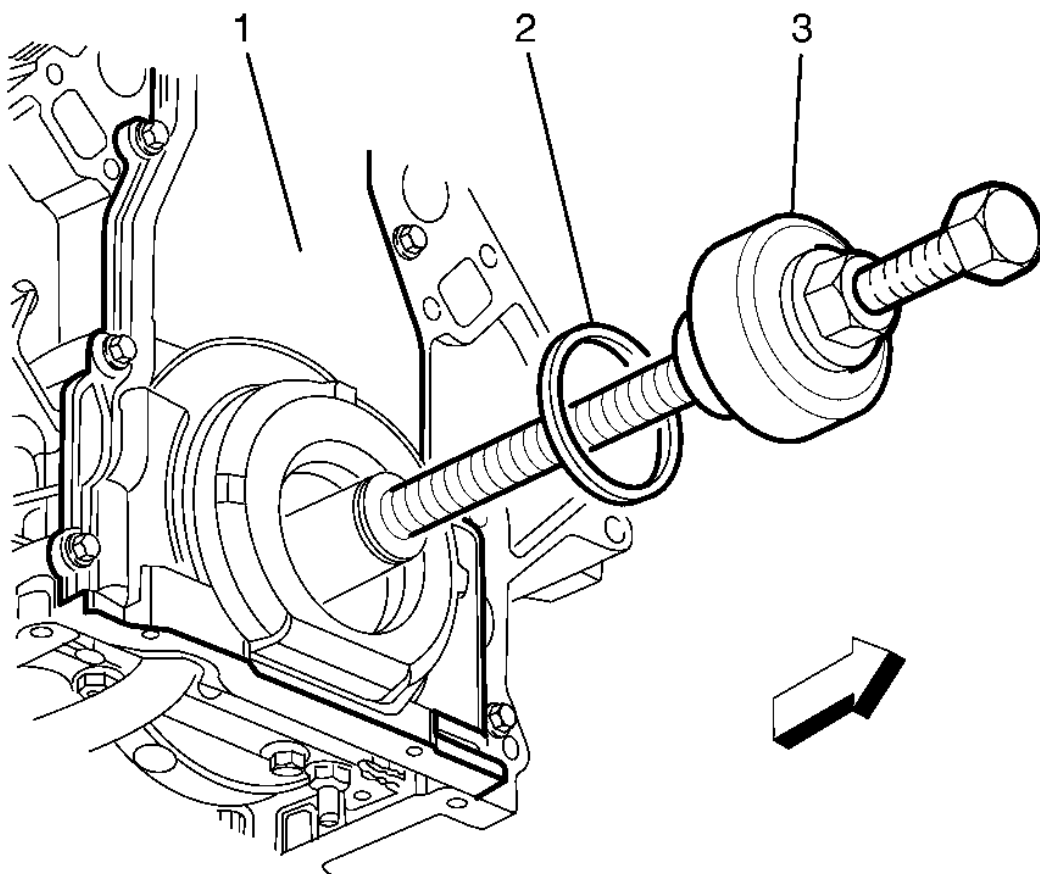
Locating J 41478 Guide, Oil Seal & Front Engine Cover Bore
